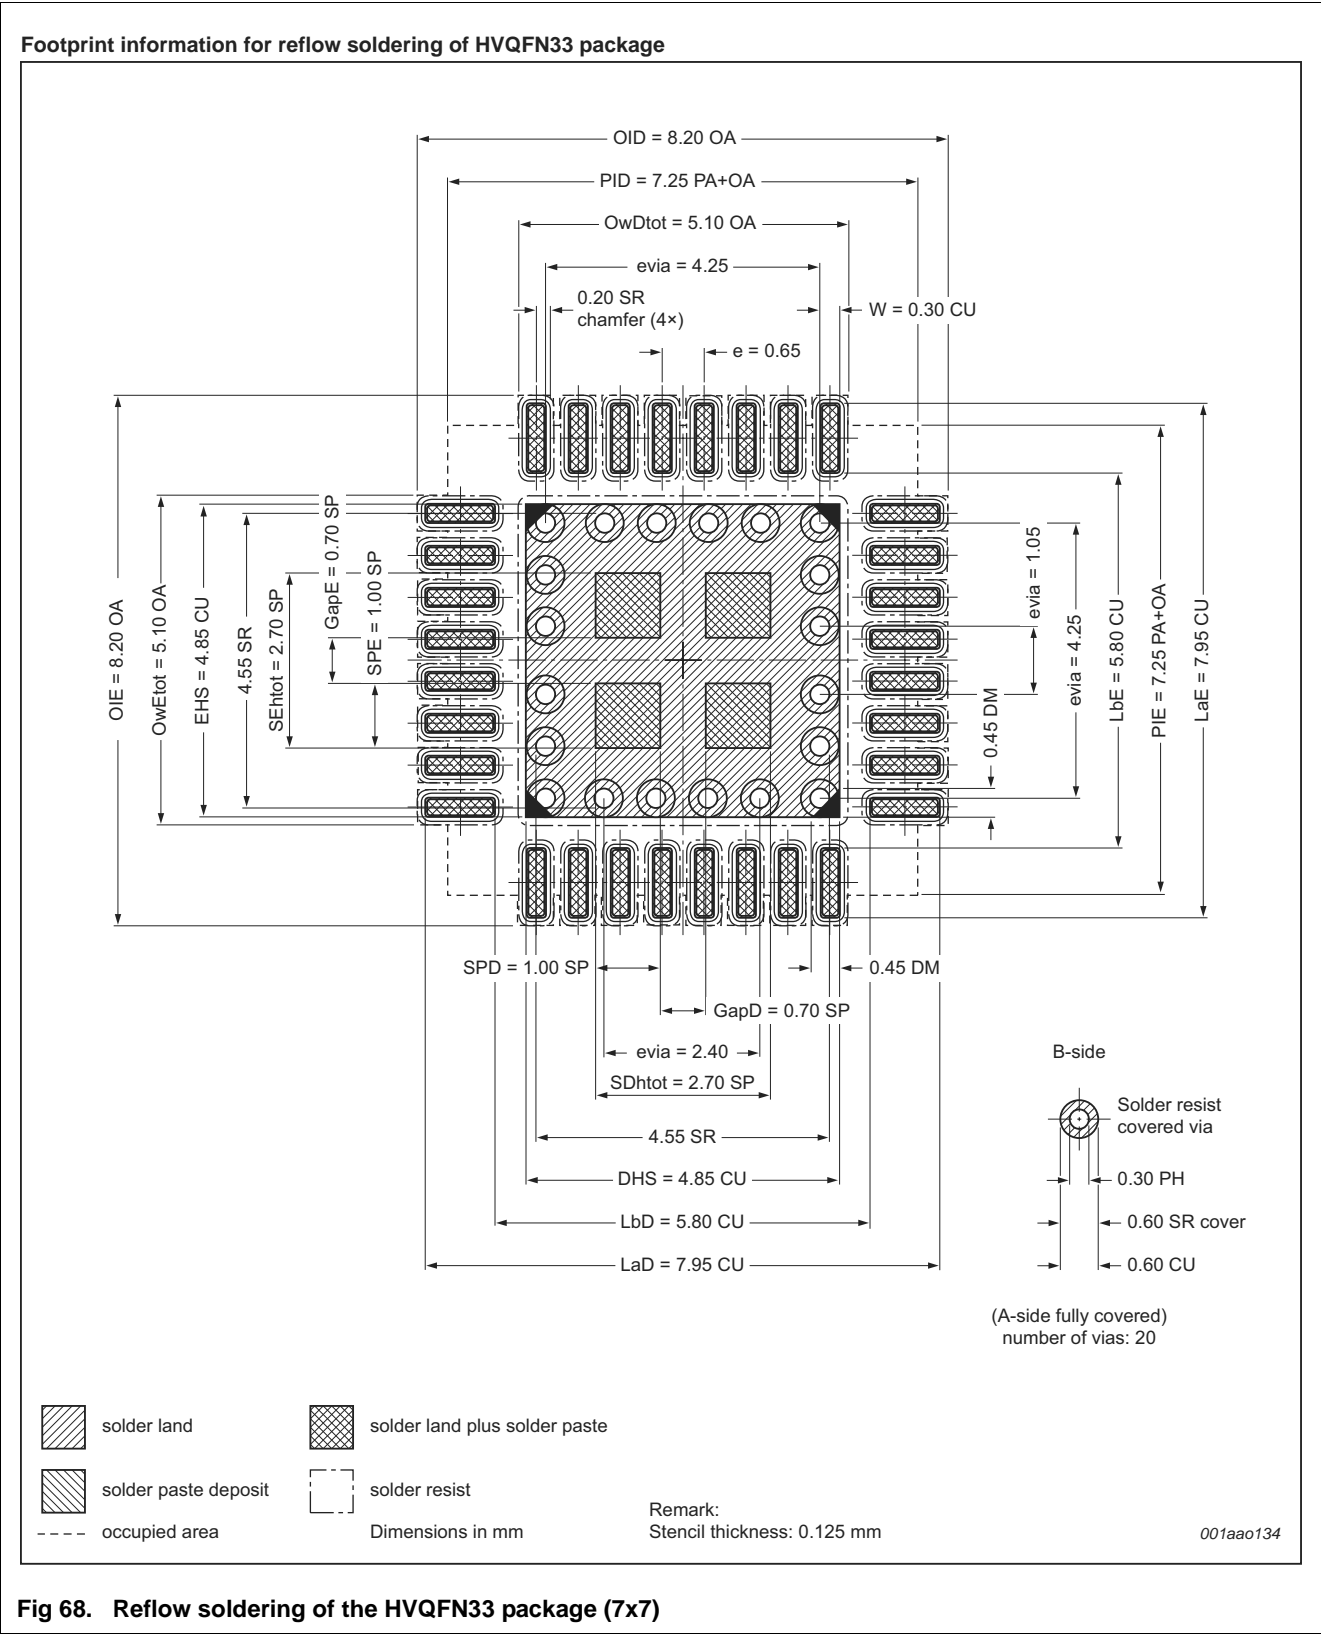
Reflow soldering of the HVQFN33 package (7x7)
